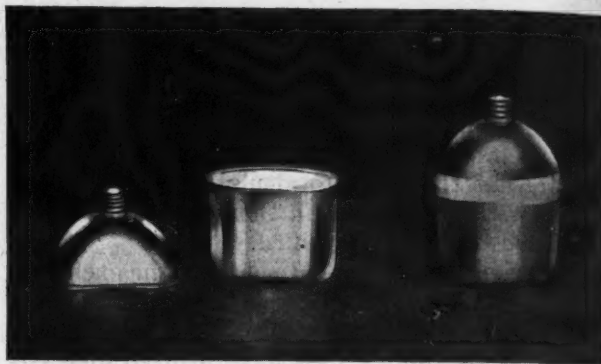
Top and Bottom Sections of Canteen, as Shown at Left, are Flanged for Edge Joint. The Canteen at Right is Fluxed Ready for Welding
